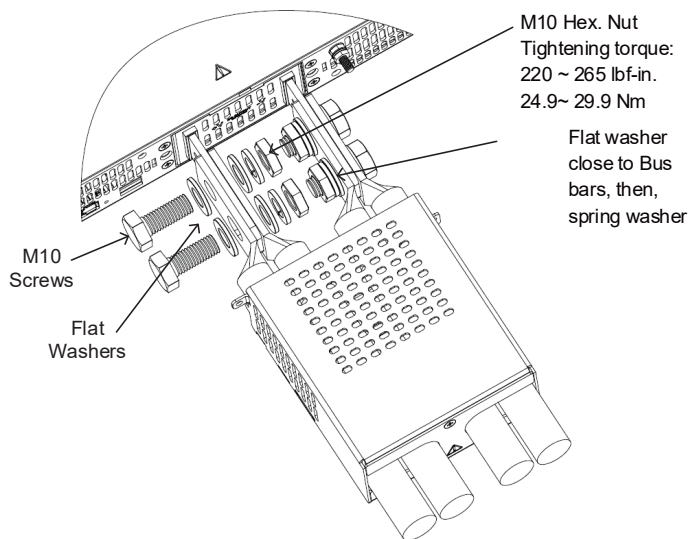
10V 3.4kW and 5kW Wires Assembly
